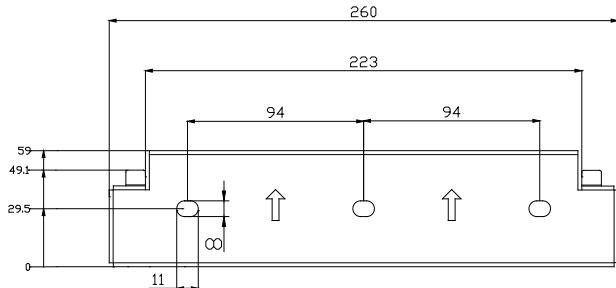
Dimensions of rear panel of R5-0.7K/1K/1.5K/2K/2.5K/3K-S1
